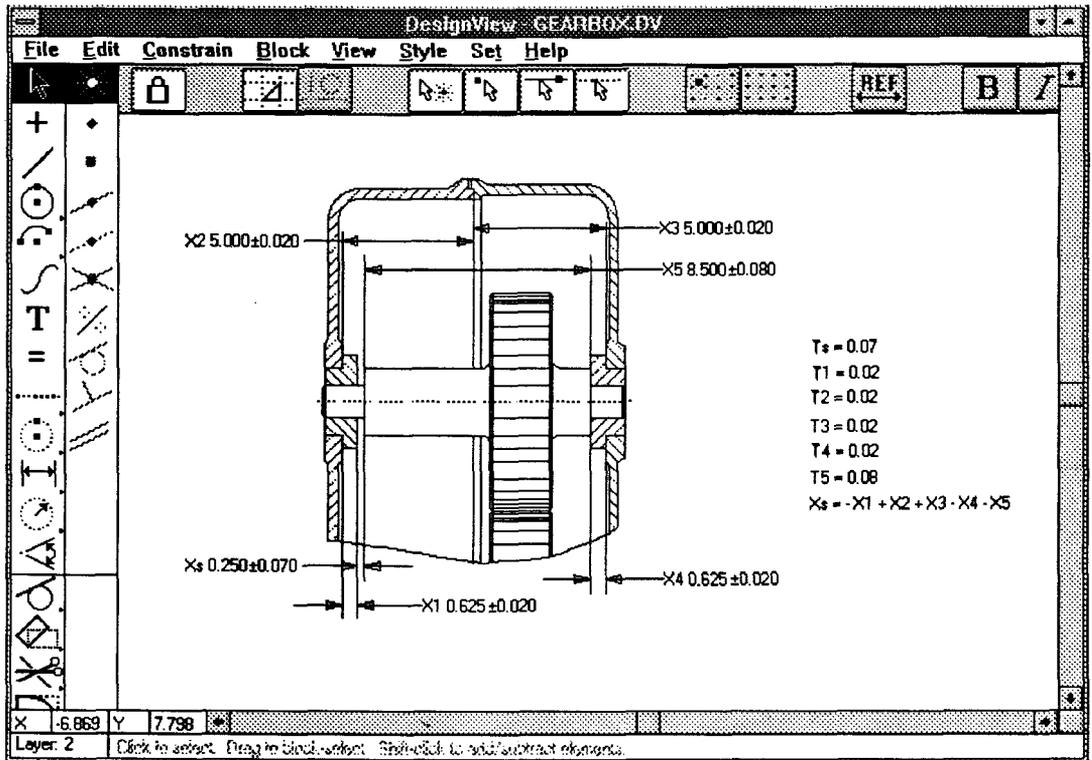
Labeling Dimensions and Tolerances in DesignView Drawing
